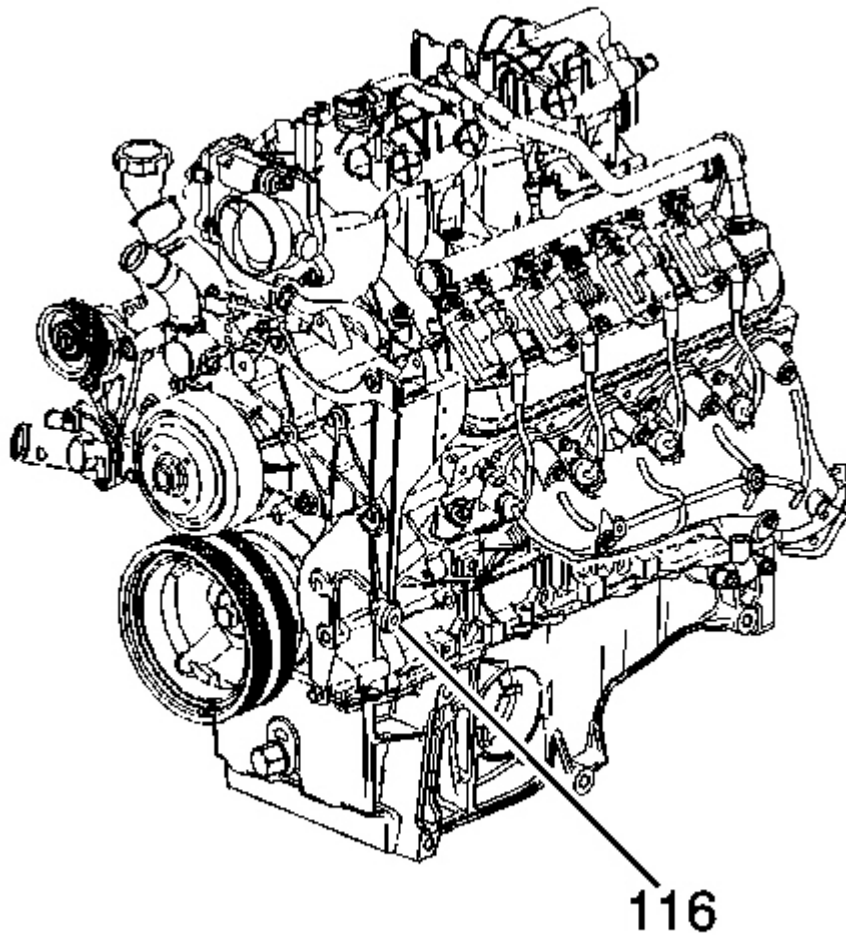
Locating Engine Block Left Front Oil Gallery Plug
